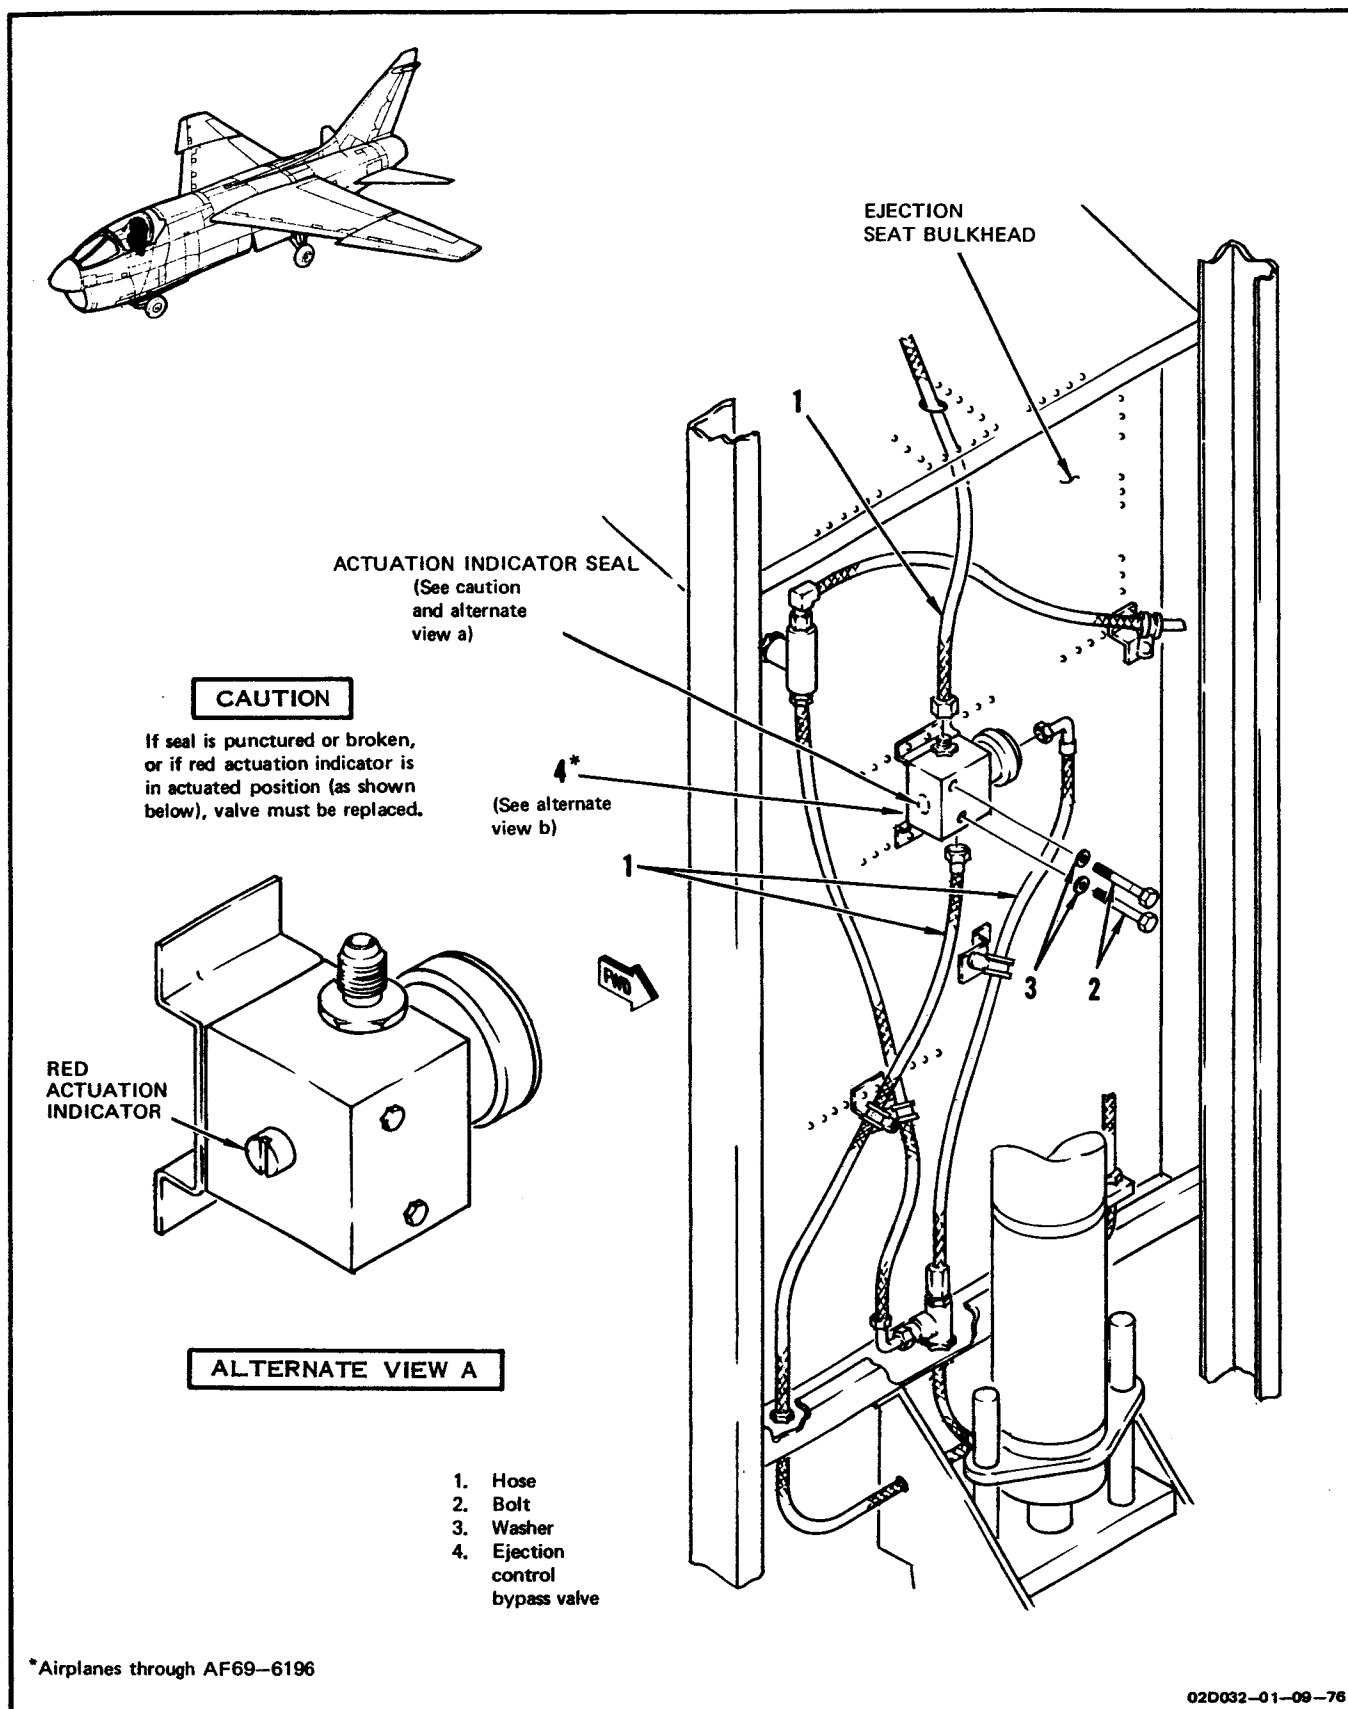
Ejection Control Bypass Valve Removal and Installation (Sheet 1)
